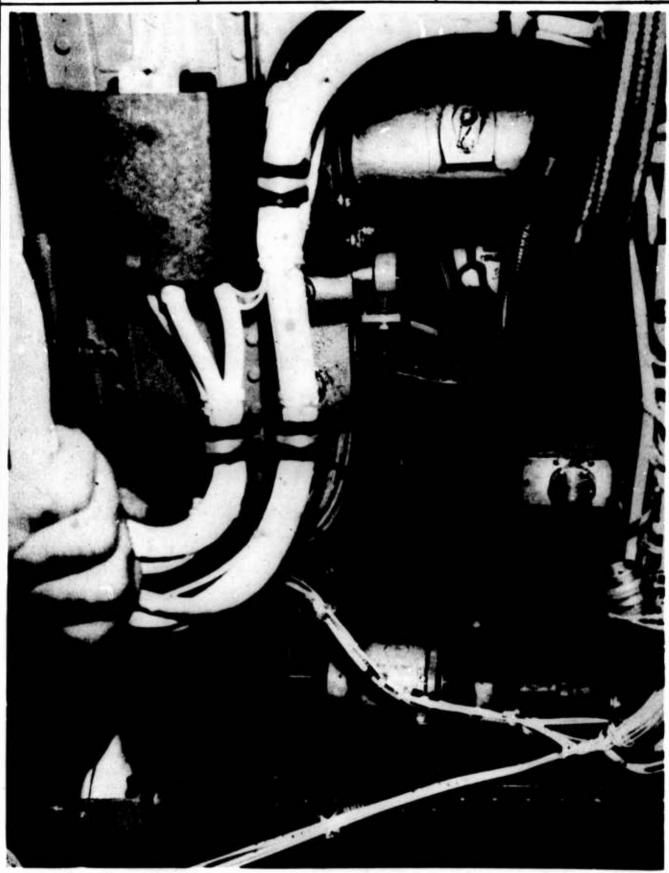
Model UH-1B, S/N AF 62-023; Main Rotor Blade Radar Installation - Lower Mast Assembly
